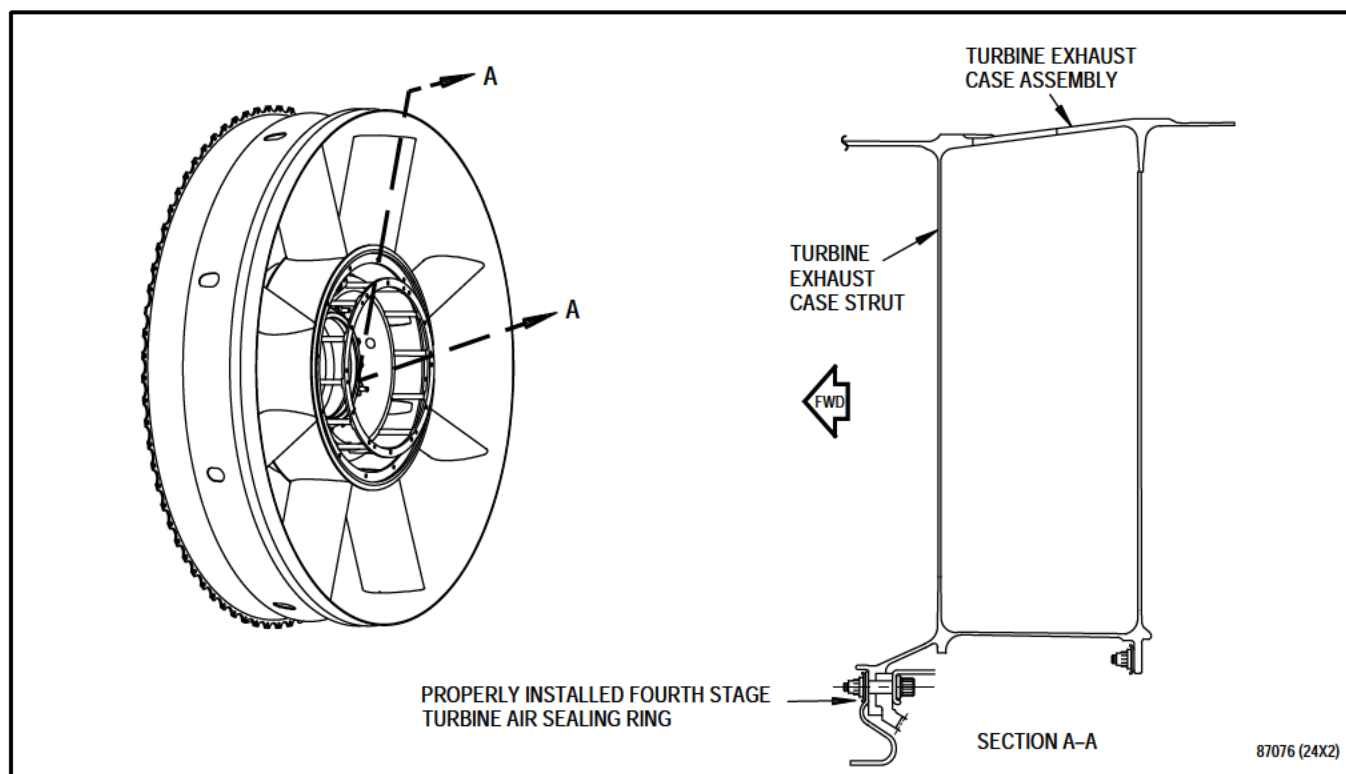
Fourth Stage Turbine Air Sealing Ring Assembly - Installation
